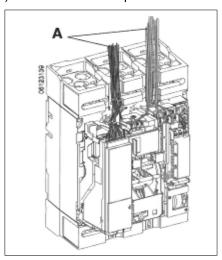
CONTROL WIRING (A) TO ACCESSORIES
